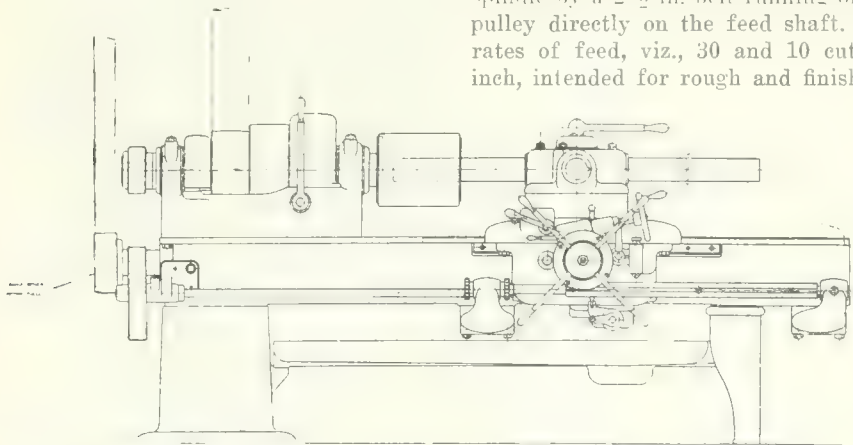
OUTLINE DRAWING OF NO. 5 SHELL BORING LATHE.
